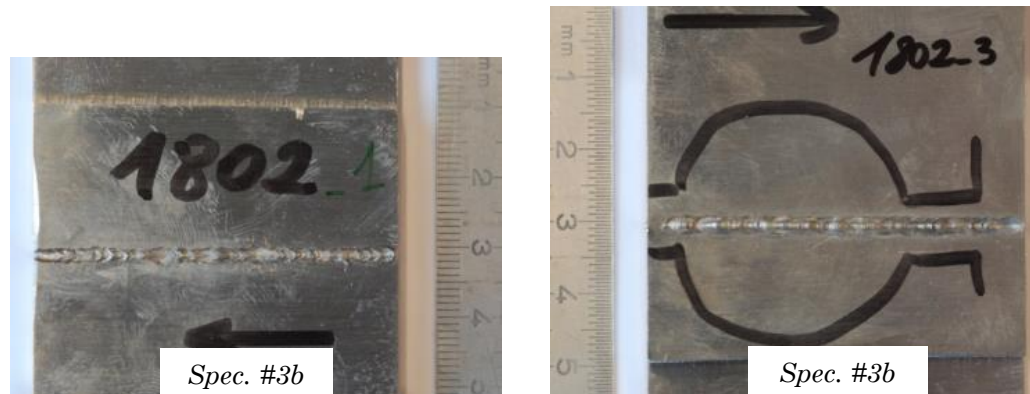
Macro-view (top and bottom in left and right pictures respectively) of laser welded surfaces using the #3b experimental condition
